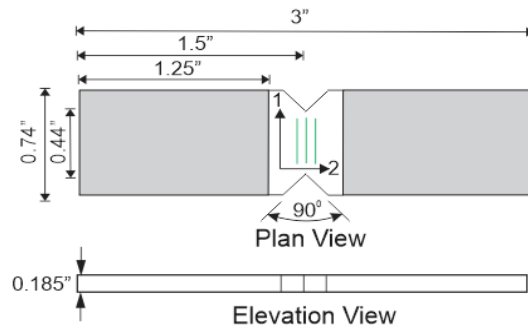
2-1 plane Shear Experimental Specimen Layout
